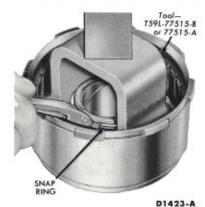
Clutch Piston Spring Retainer Snap Ring Removal or Installation
